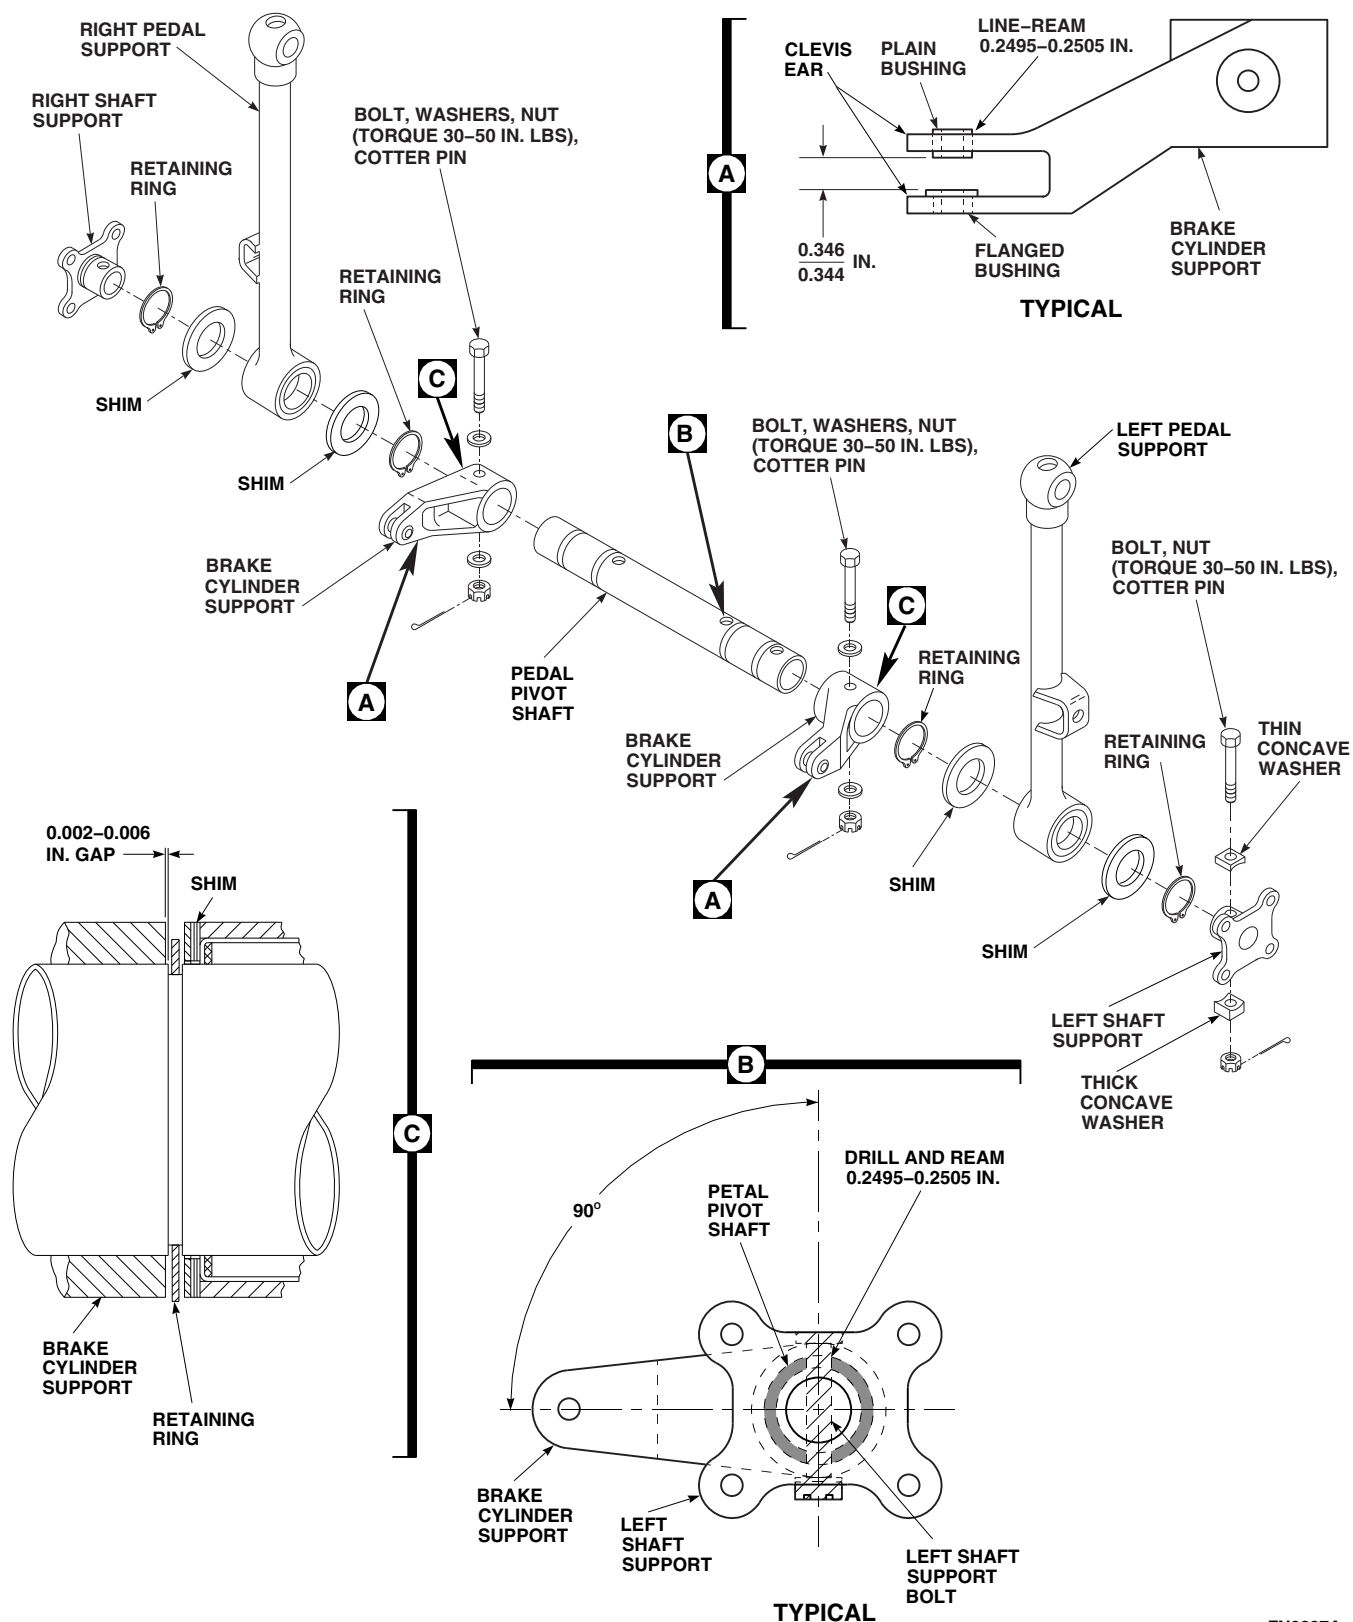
REPAIR YAW CONTROL PEDAL SUPPORT ASSEMBLY, 70400-01601-043 (BENCH)
